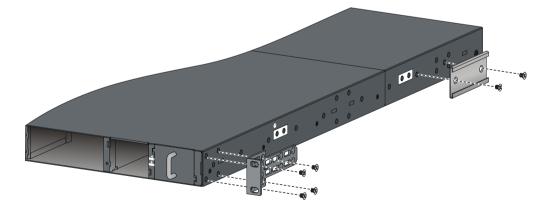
Attaching the mounting brackets and chassis rails to the HPE 5940 2-slot switch (network port-side mounting position for the mounting brackets)
